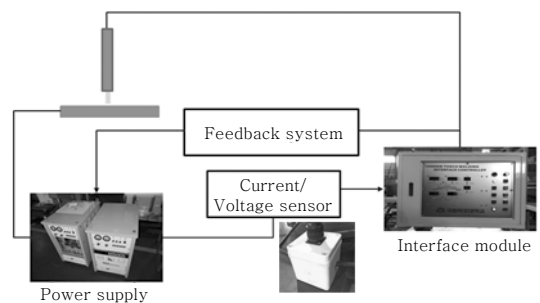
System configuration for tandem welding using conventional welding machine
